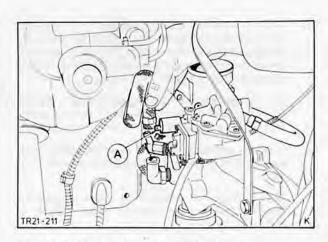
Brake servo vacuum hose ('A' engine) A – Idling cut-off valve
